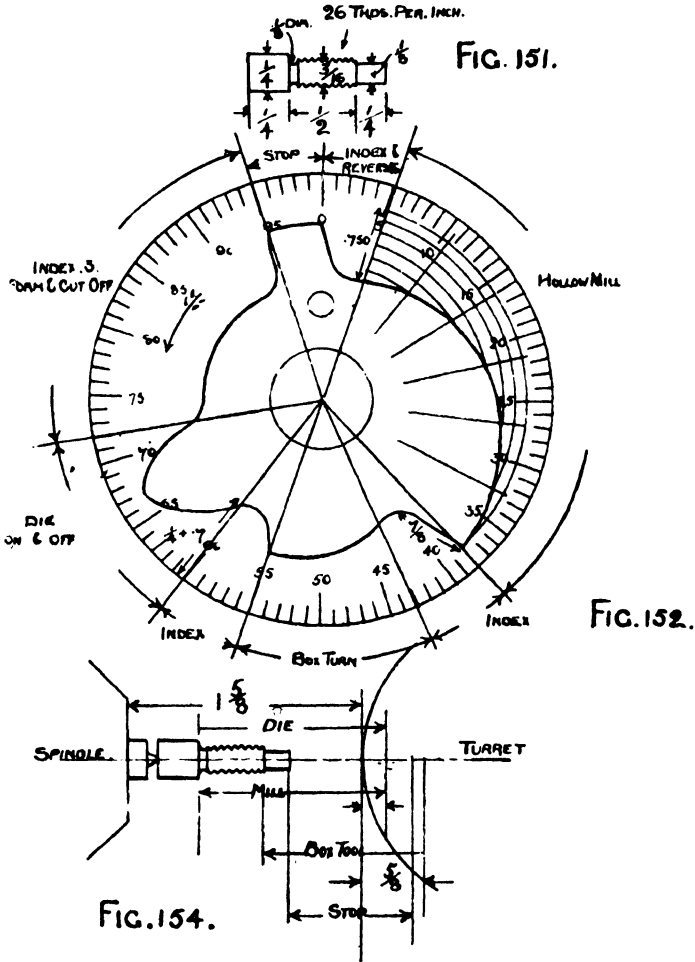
COMPONENT FOR WHICH CAMS FIGS. 153 AND 154 WERE DESIGNED
